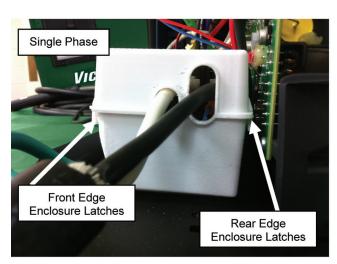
Latches engaged on the Enclosure. (REAR PANEL REMOVED FOR CLARITY)
